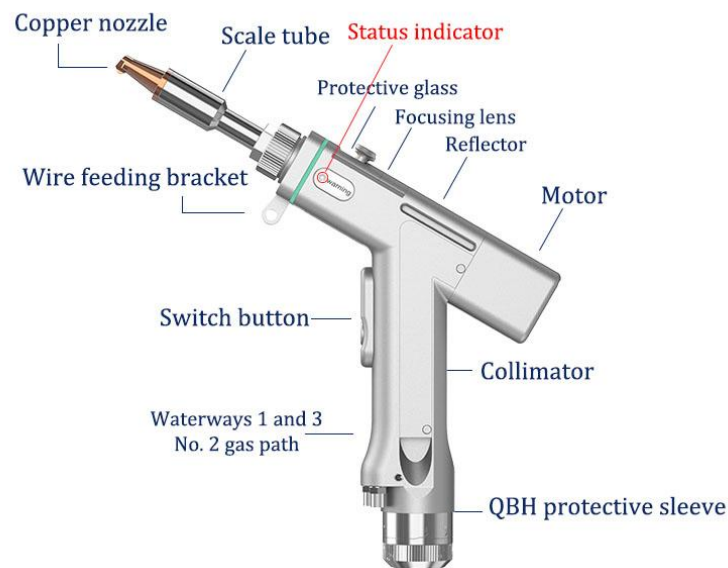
Schematic diagram of the SUP-23T welding head
